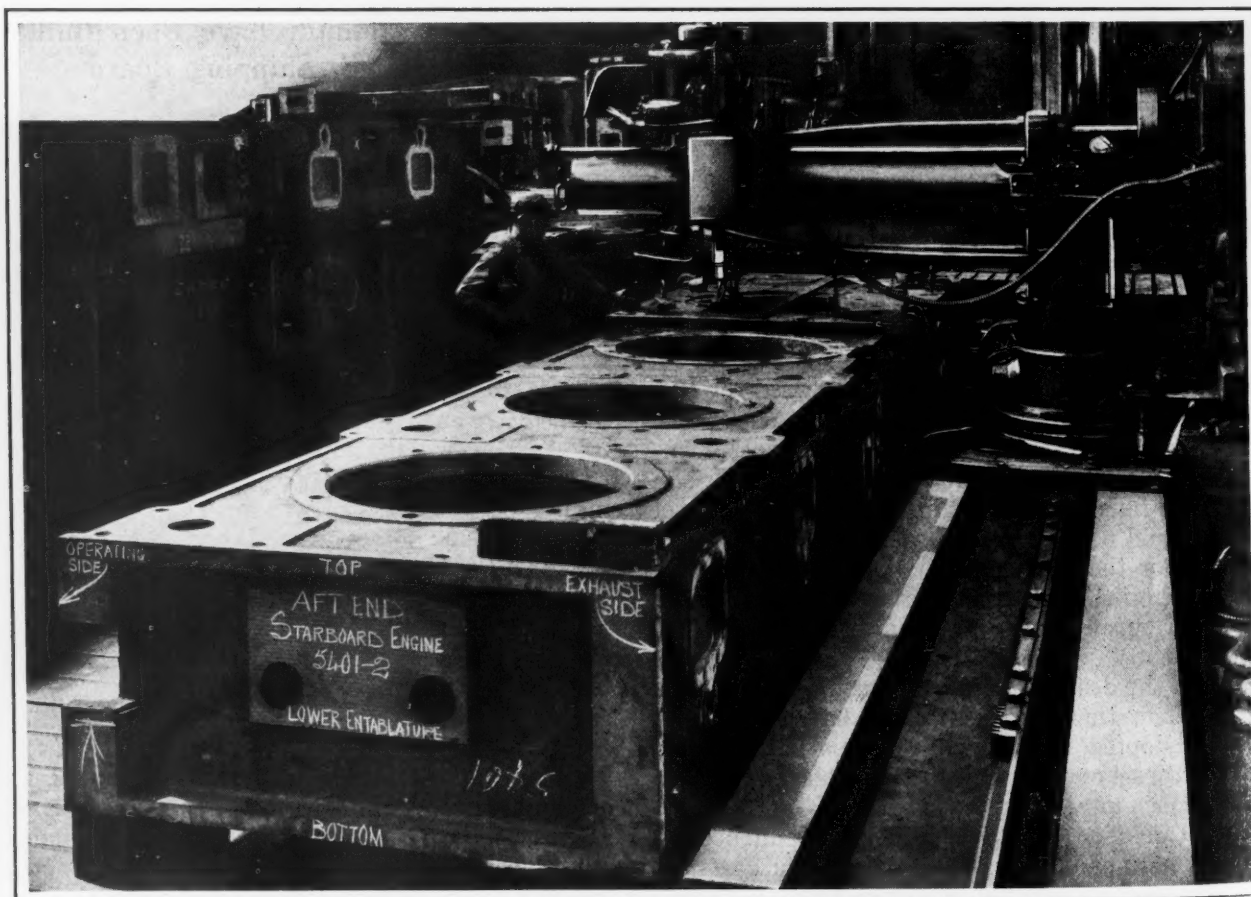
Drilling Holes Over a Large Casting Area by Employing a Traveling Radial Drilling Machine
